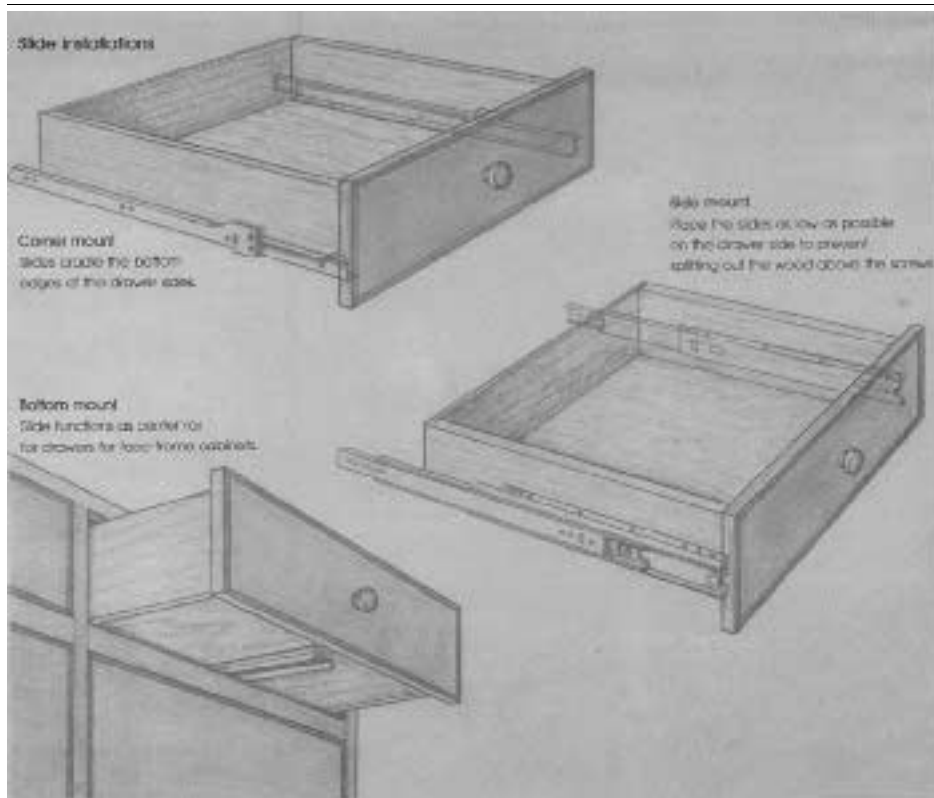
Slides are either side-mounted, corner-mounted, or bottom-mounted. Corner mounting is preferable because the slides cradle the drawer and carry its weight well. If you're using side-mounted slides, mount them as close to the bottom of the drawer side as possible to avoid splitting. Avoid bottom-mounted slides if you can: They tend to be shabby.
